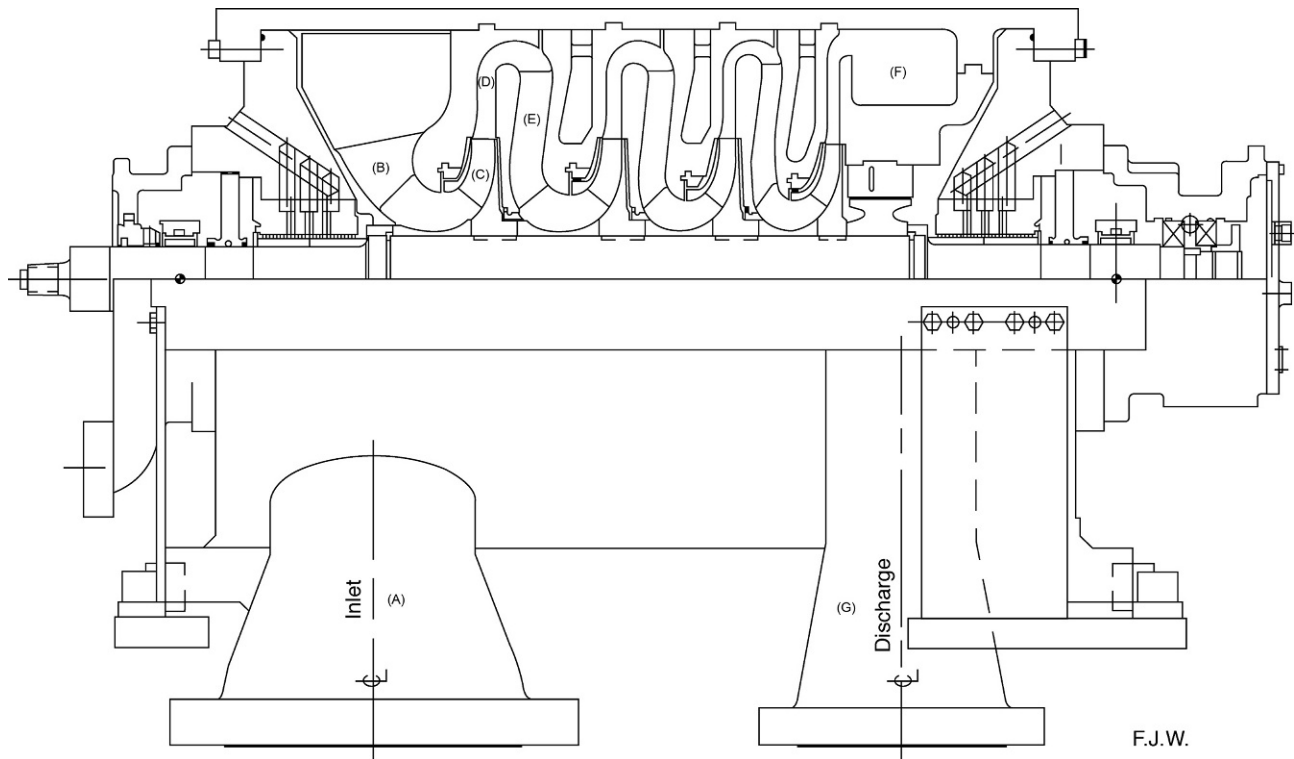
Multistage centrifugal compressor: (a) the inlet nozzle, (b) inlet guide vanes, (c) impeller, (d) radial diffuser, (e) return channel, (f) collector volute, and (g) discharge nozzle.
